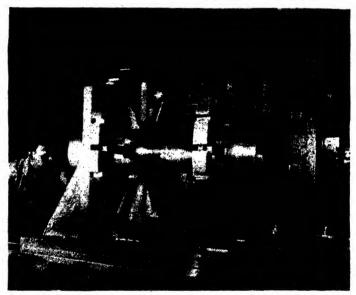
Machining the spider of a large honing head on a Defiance machine.
